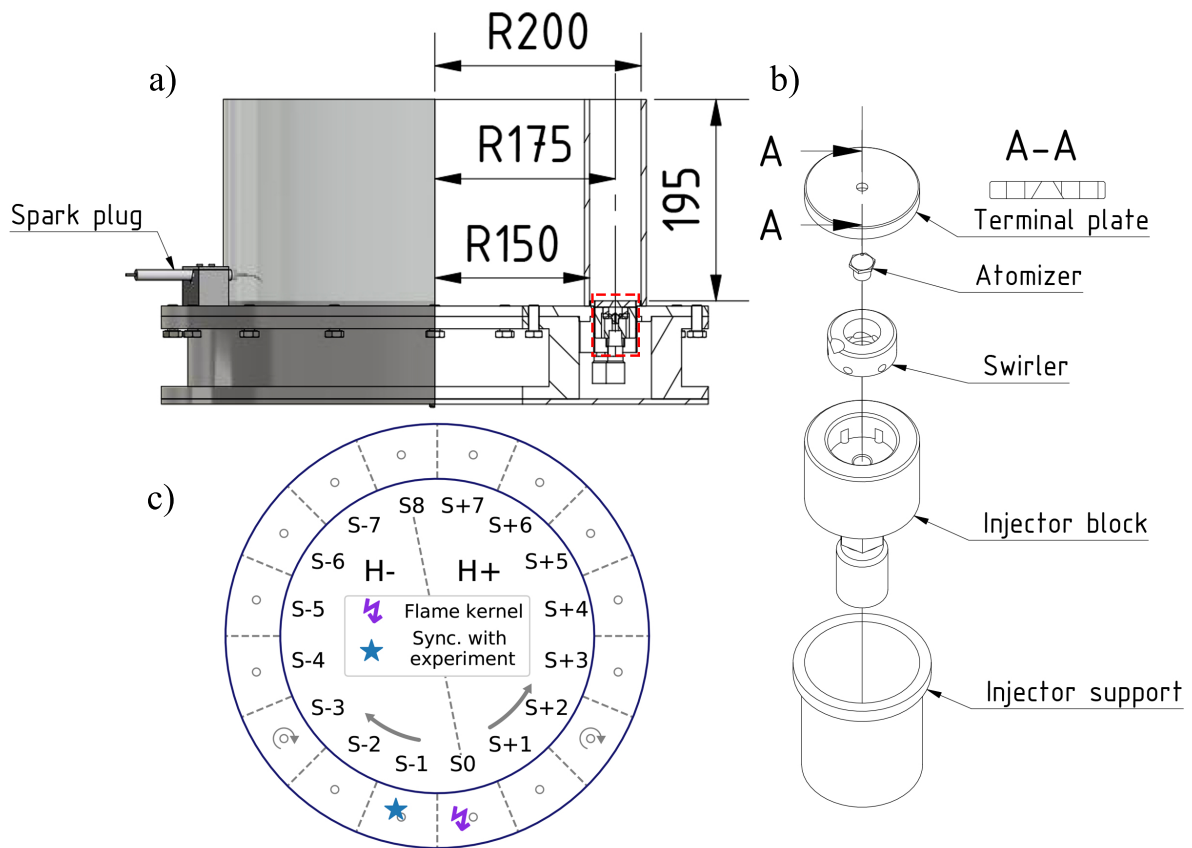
Main combustor features of MICCA-Spray: a) dimensions (in millimeter) of the combustion chamber and injector position; b) exploded view of an injector assembly (corresponding to the dashed rectangle in (a)) with concentrically mounted swirler and fuel atomizer; c) sector layout and labeling used in this work.
